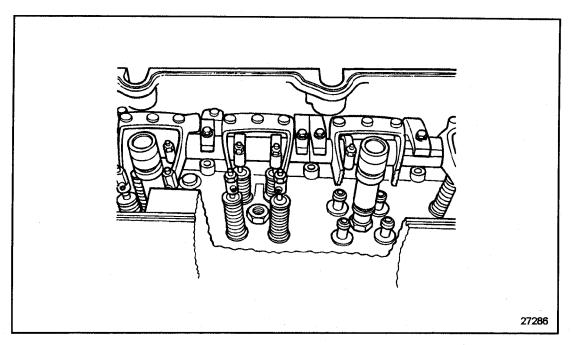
Valve Height Adjustment Components for the Series 60G Engine
